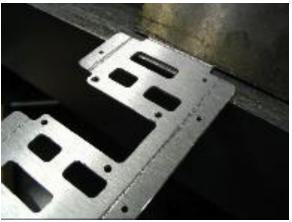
A properly clamped part. Notice the scoring line is still visible outside the clamp, and the edge of this line is aligned with the edge of the clamp.
